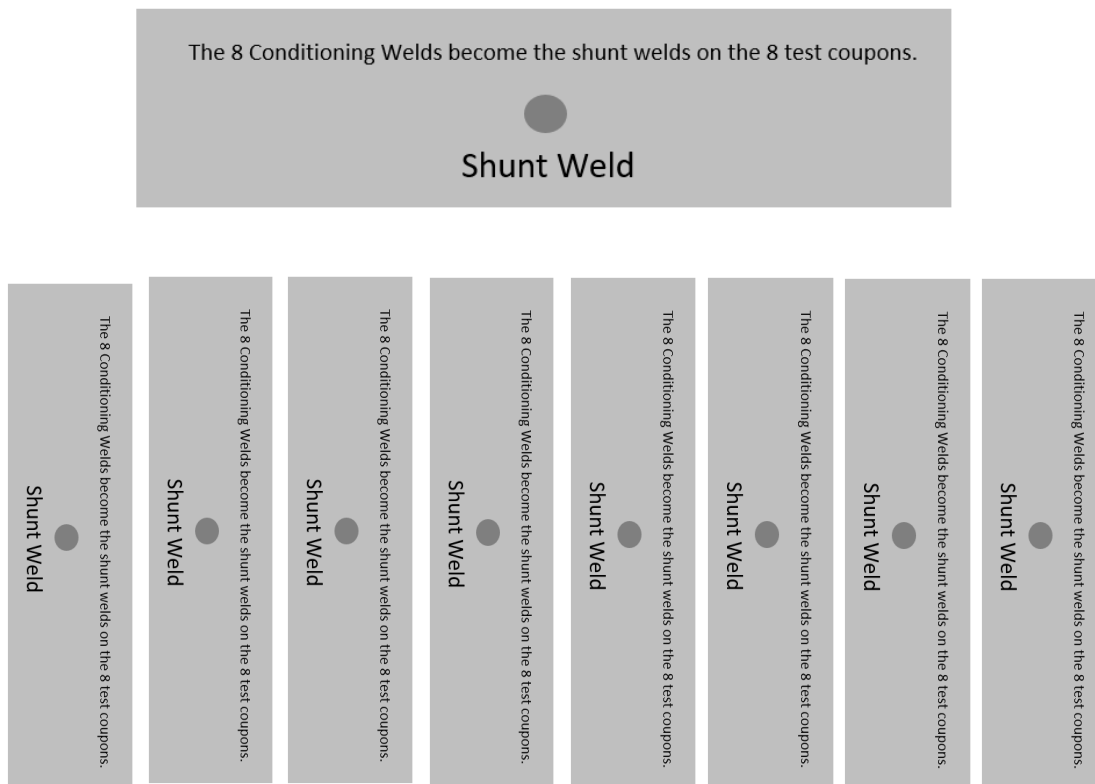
The conditioning welds later serve as shunt welds on each test coupon.
